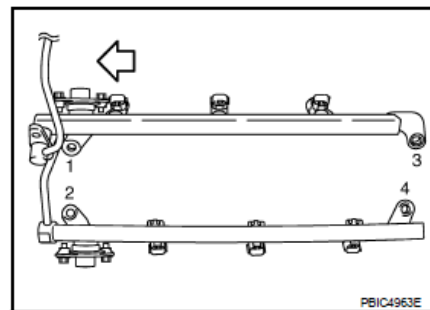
Identifying Fuel Tube And Fuel Injector Assembly Mounting Bolts Tightening Sequence
